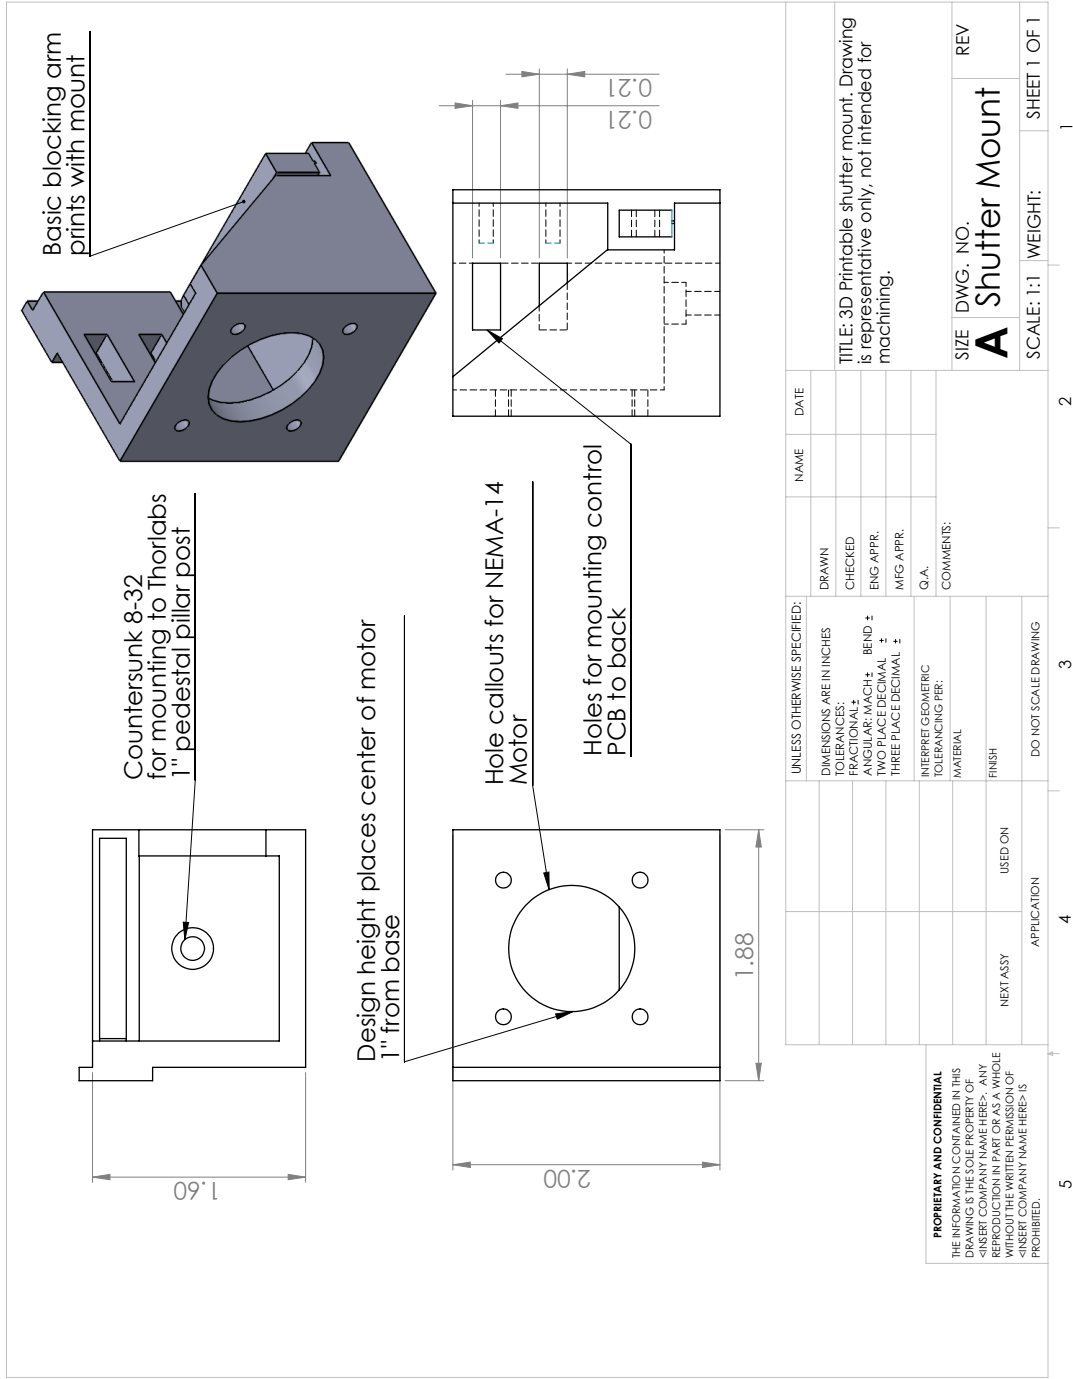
3D printable mount for the stepper motor beam shutters.
